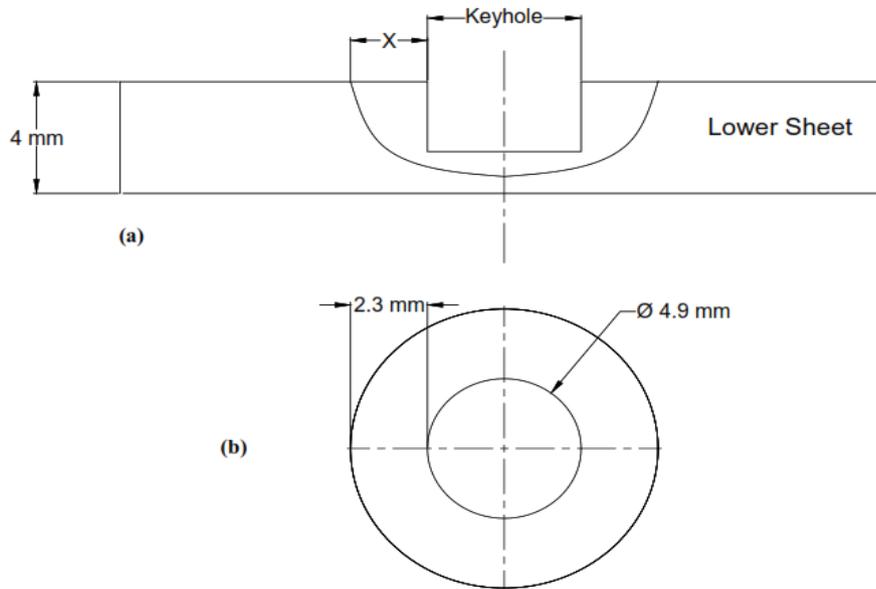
(a) Schematic illustration of the cross section of FSSW joint and (b) geometry of the weld bonded area, x: nugget thickness
